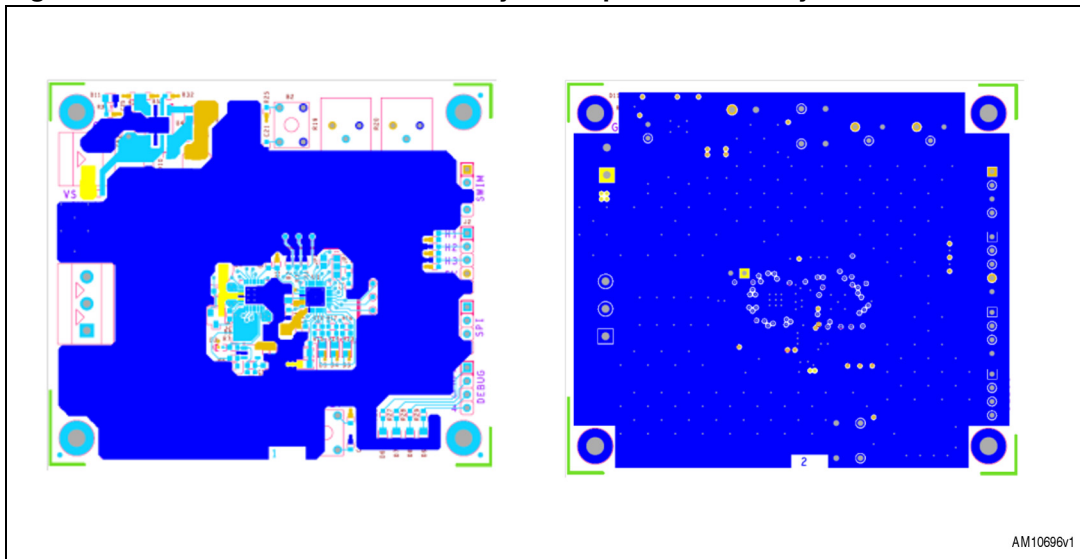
STEVAL-IFN004V1 board layout - bottom and inner 2 layers
